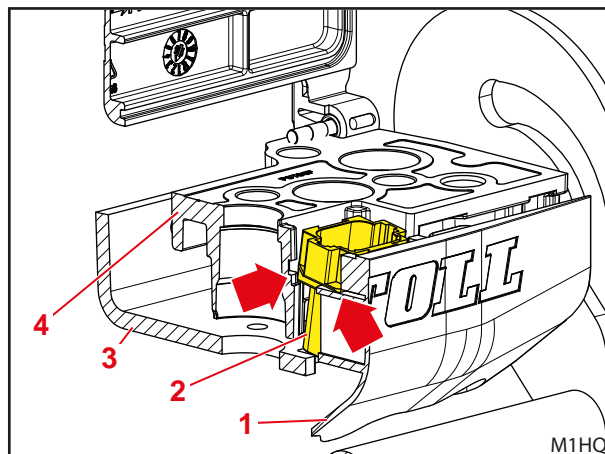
Installing the Hydro-Fix lower part with integrated electrical interface – Electric plug connector
